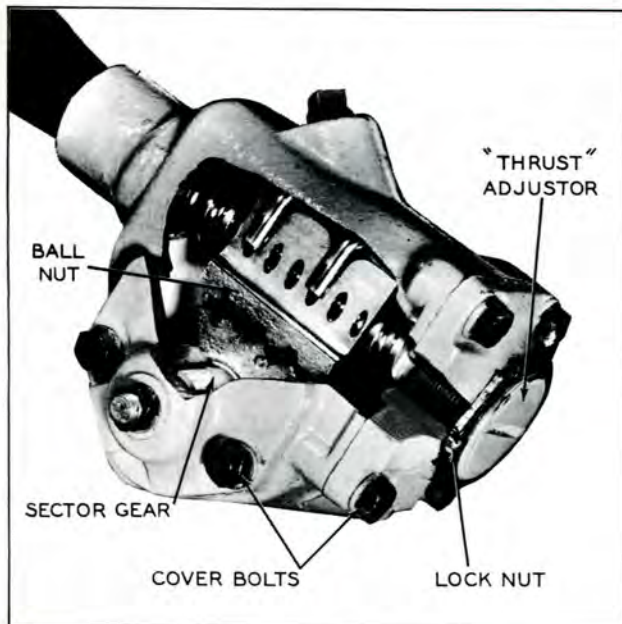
Steering Gear Thrust Adjustment (Worm Bearings)
